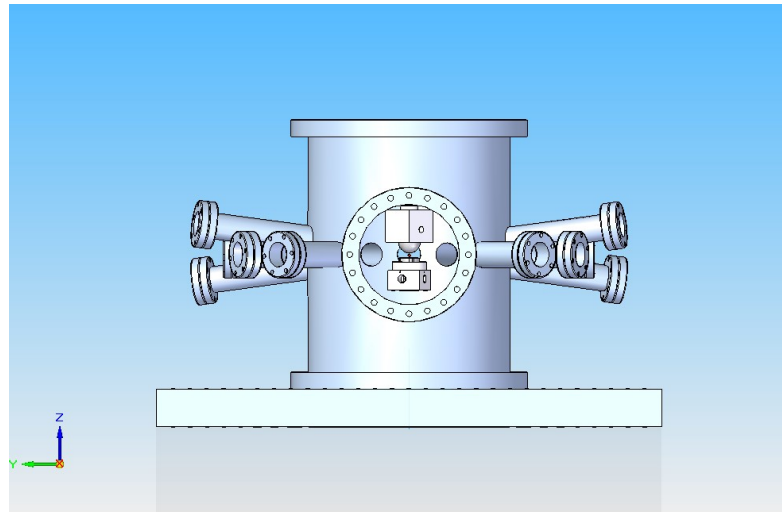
Front View of chamber with electrode assembly shown inside for context.
